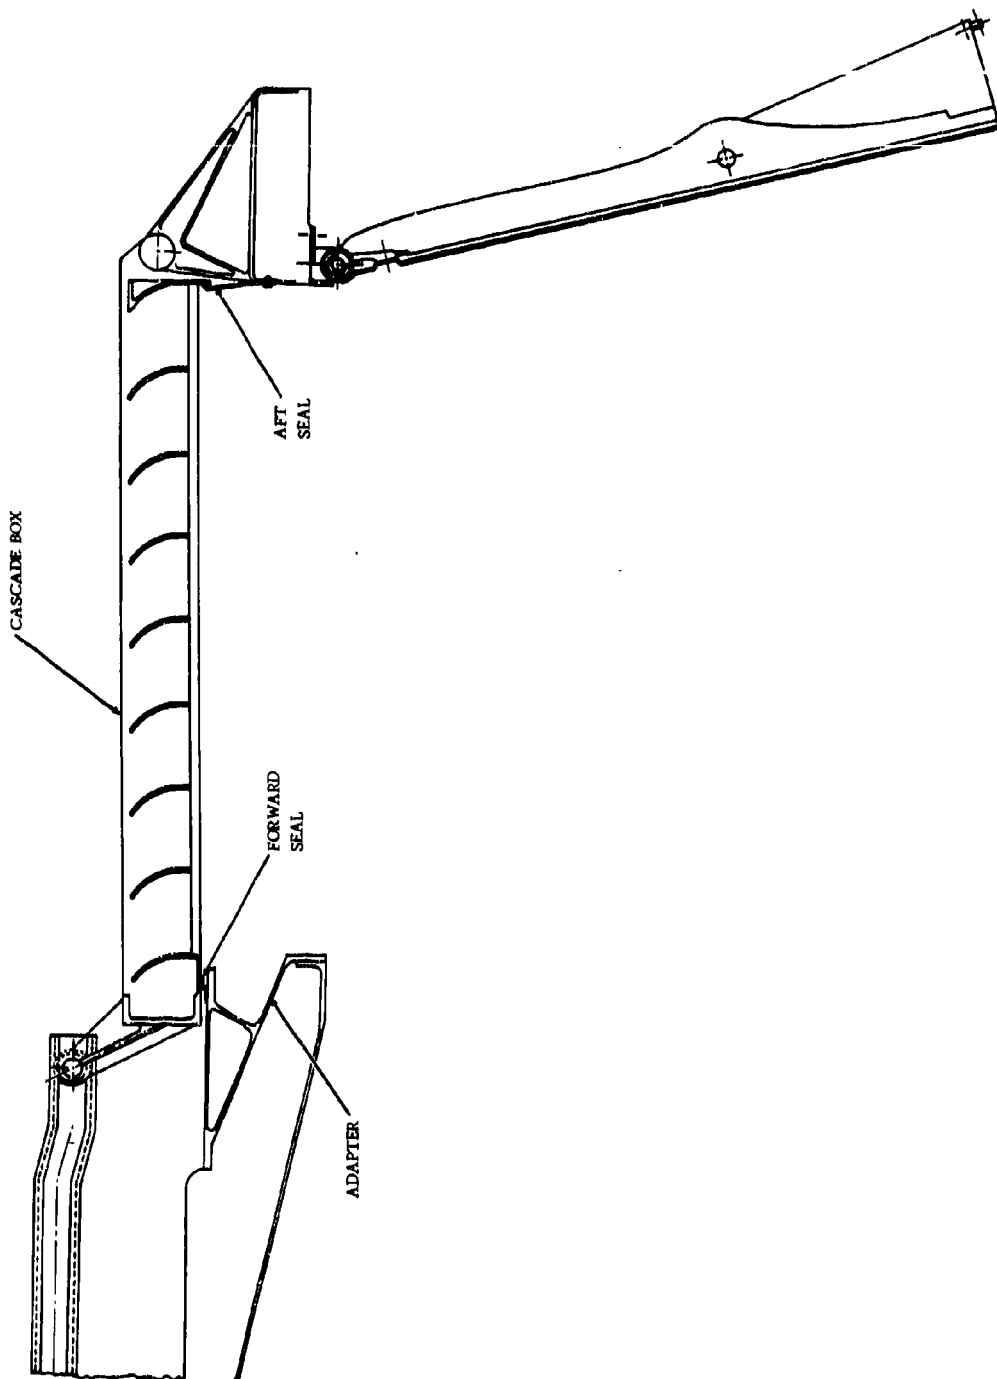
SECTIONAL VIEW CASCADE BOX IN THRUST REVERSER POSITION
